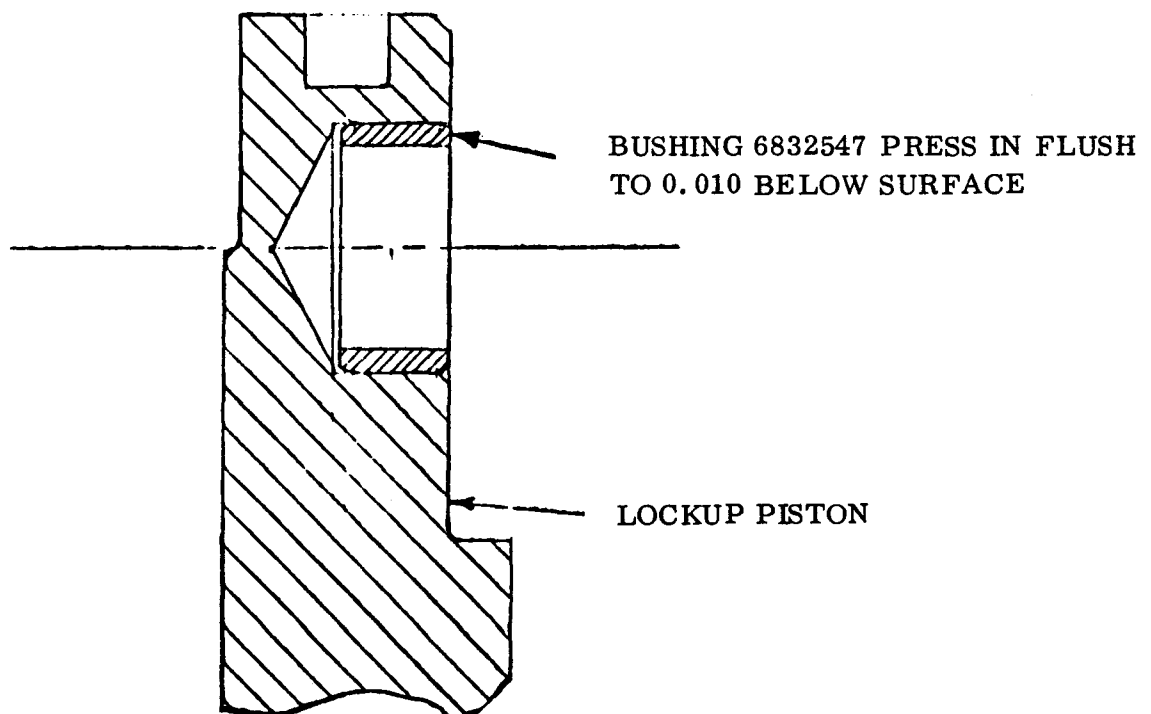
LOCKUP PISTON - BUSHING INSTALLED
